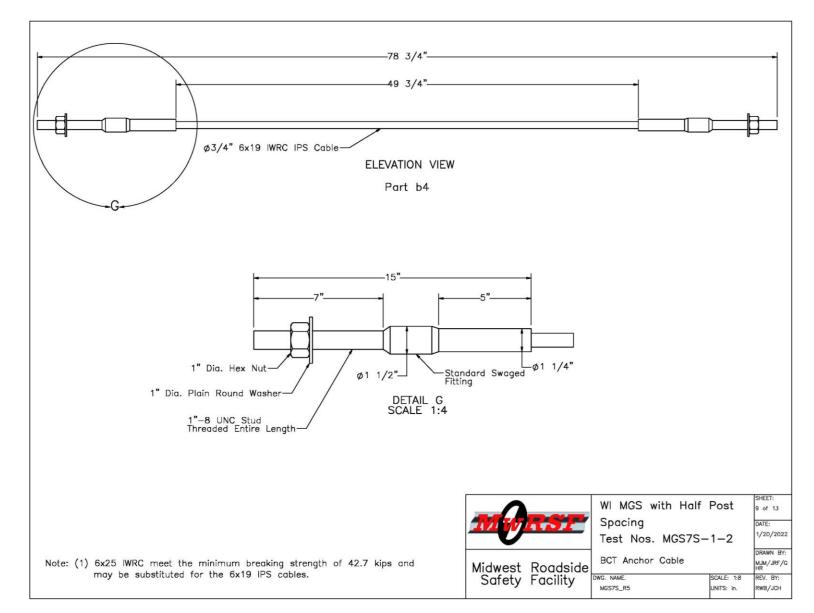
BCT Anchor Cable, Test Nos. MGS7S-1 and MGS7S-2
